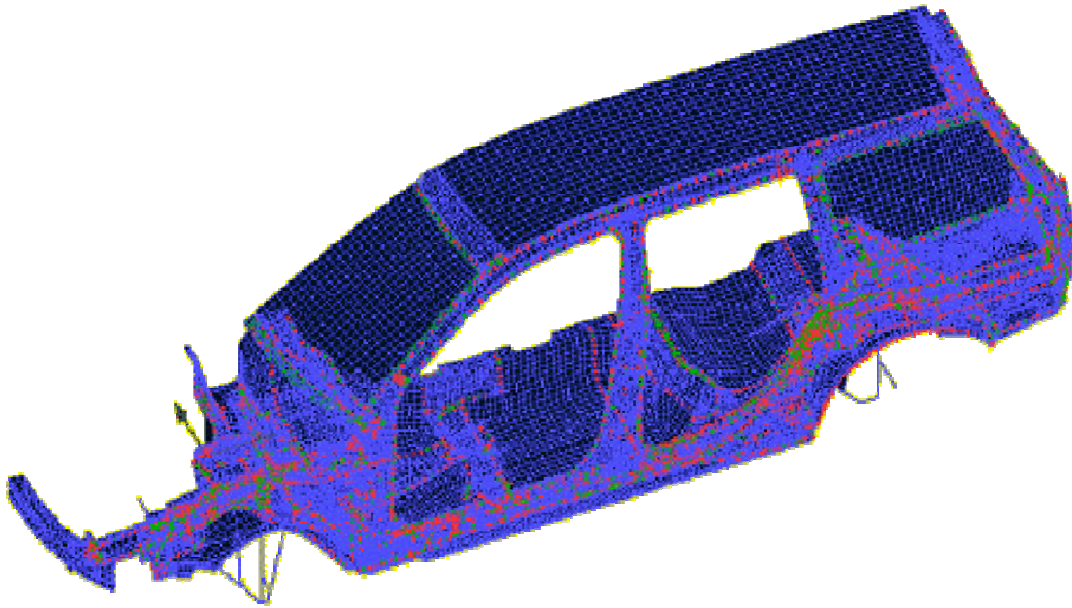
Optimization of spot welding for assembly of an automotive car body
